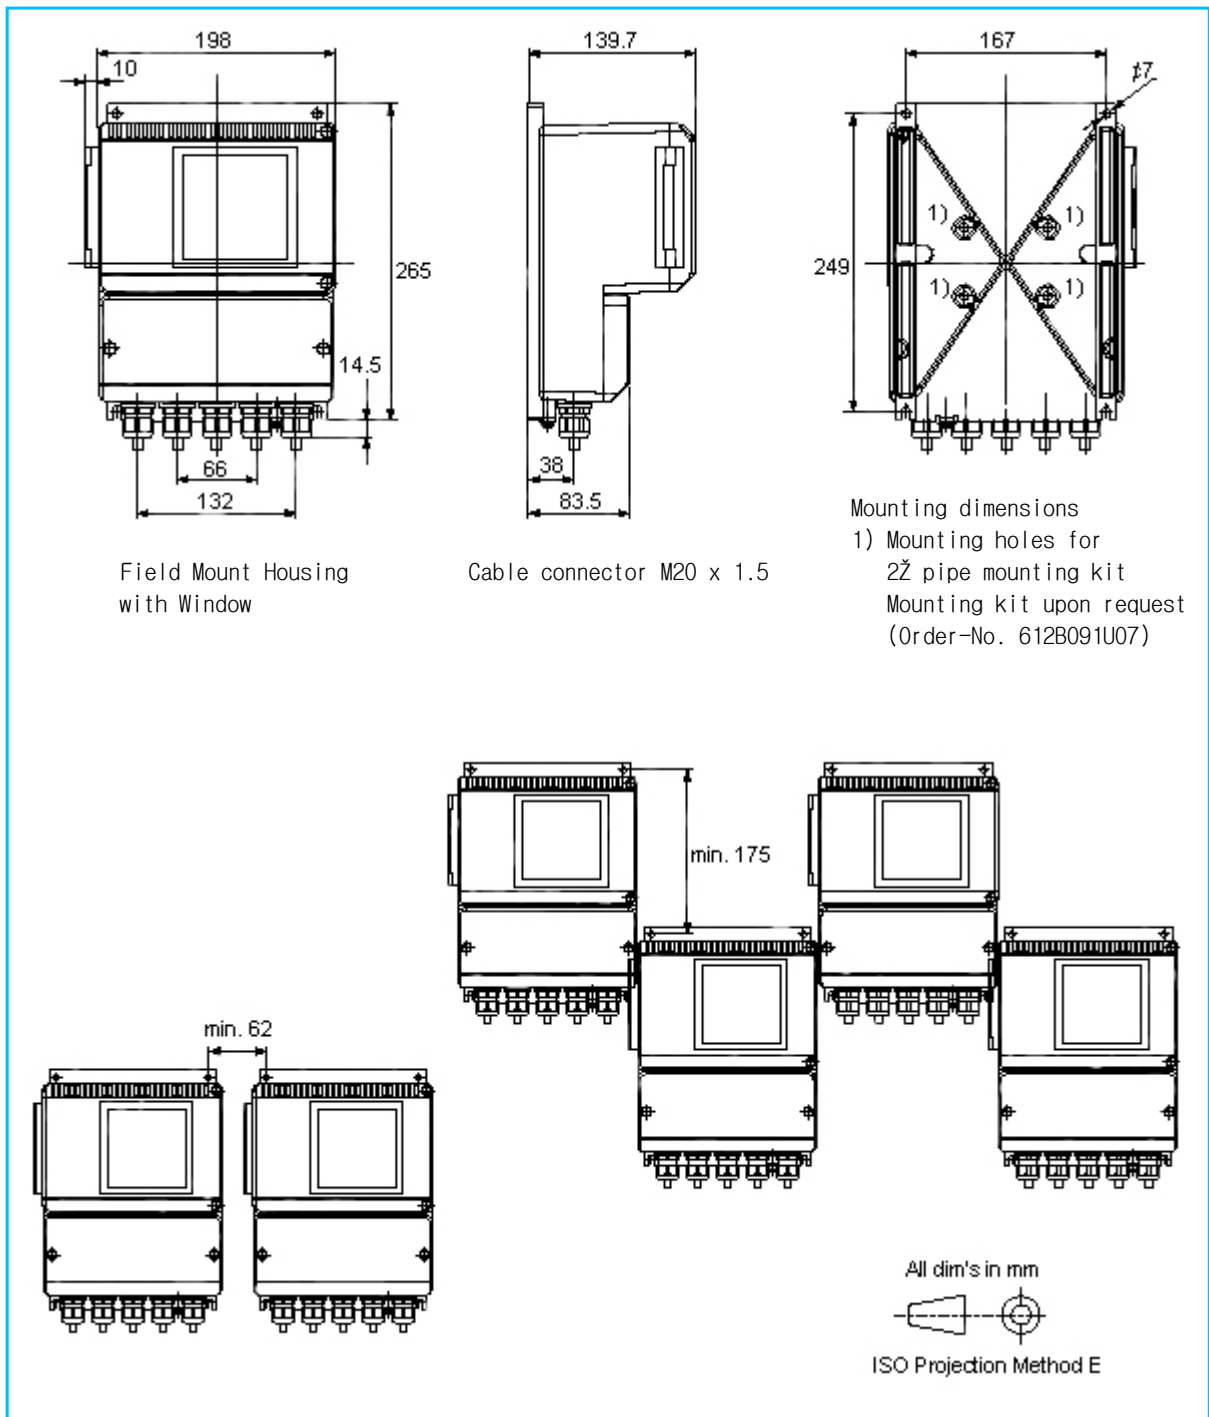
Dimensions Converter Field Mount Housing, Mounting Options
